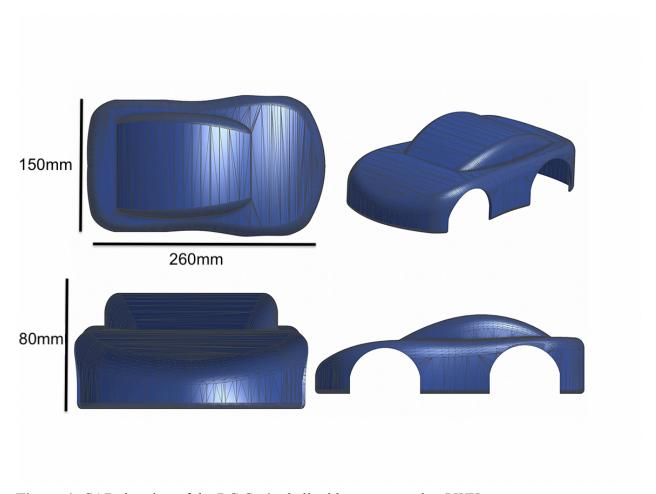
CAD drawing of the RC Car's shell with accompanying LWH measurements.
